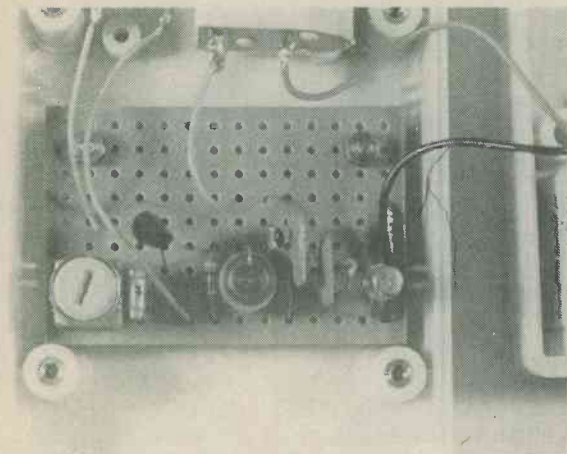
The calibrator components may be conveniently assembled on a small Veroboard panel
